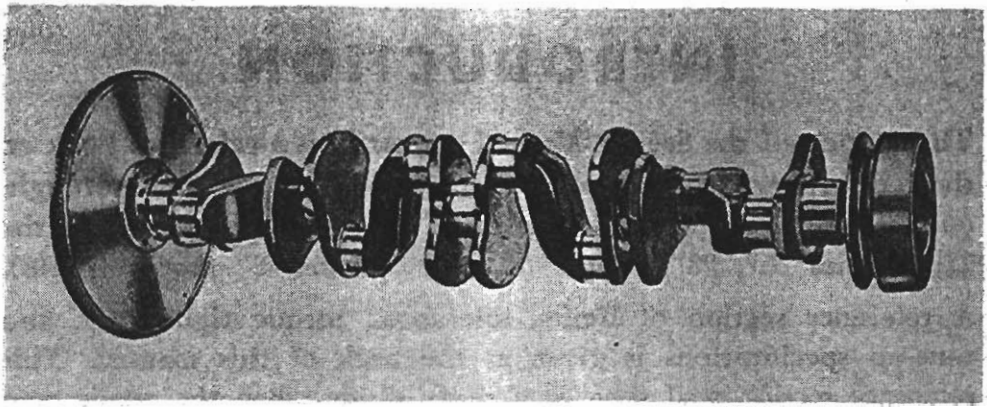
Packard Eight Crankshaft with Flywheel and Vibration Damper Attached.
